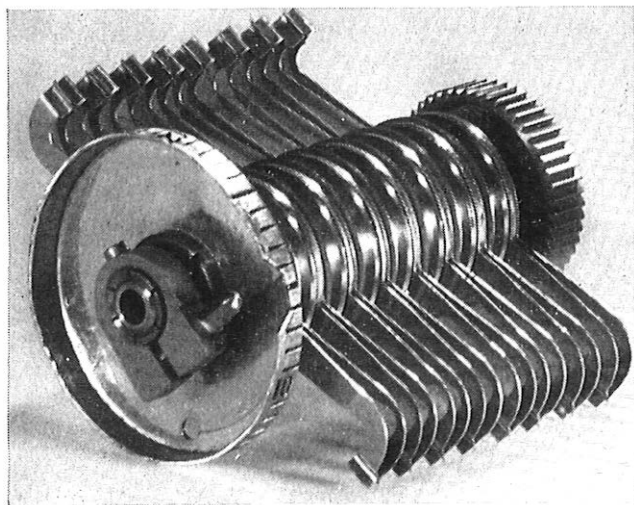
WIPER ASSEMBLY, SHOWING RADIALY-SLOTTED WIPER HUB AND CLAMP
